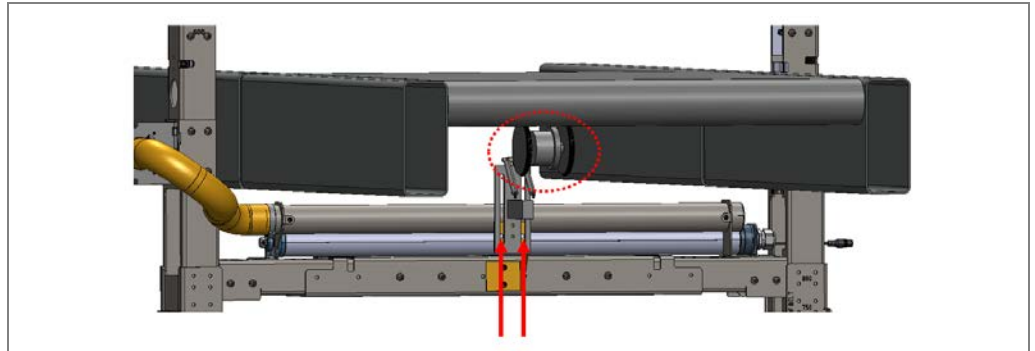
Steel frame: attaching the measuring wheel encoder to the adapter plate
